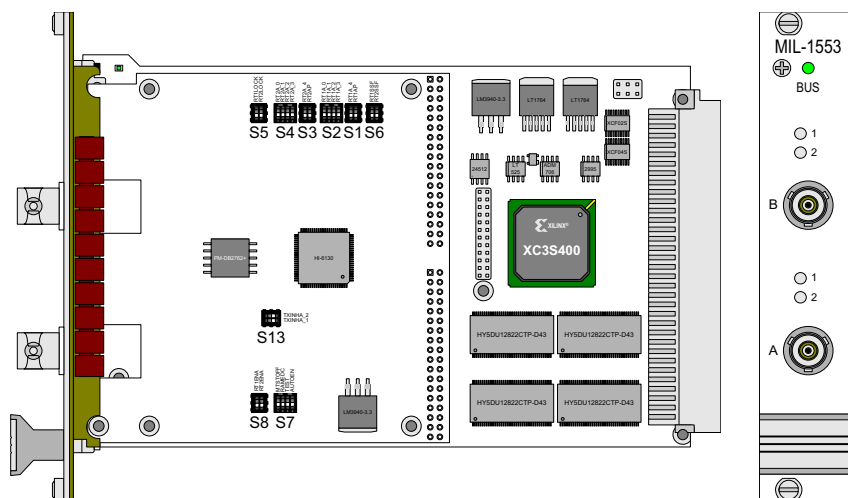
Pro II-MIL-1553 Rev. E: PCB and front panel
